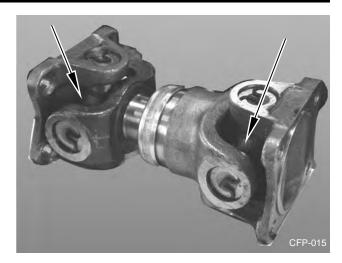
Drive Shaft Universal Joint Grease Fittings
